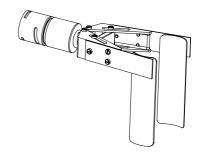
For gripping "penicillin"-type flasks in the upright position
